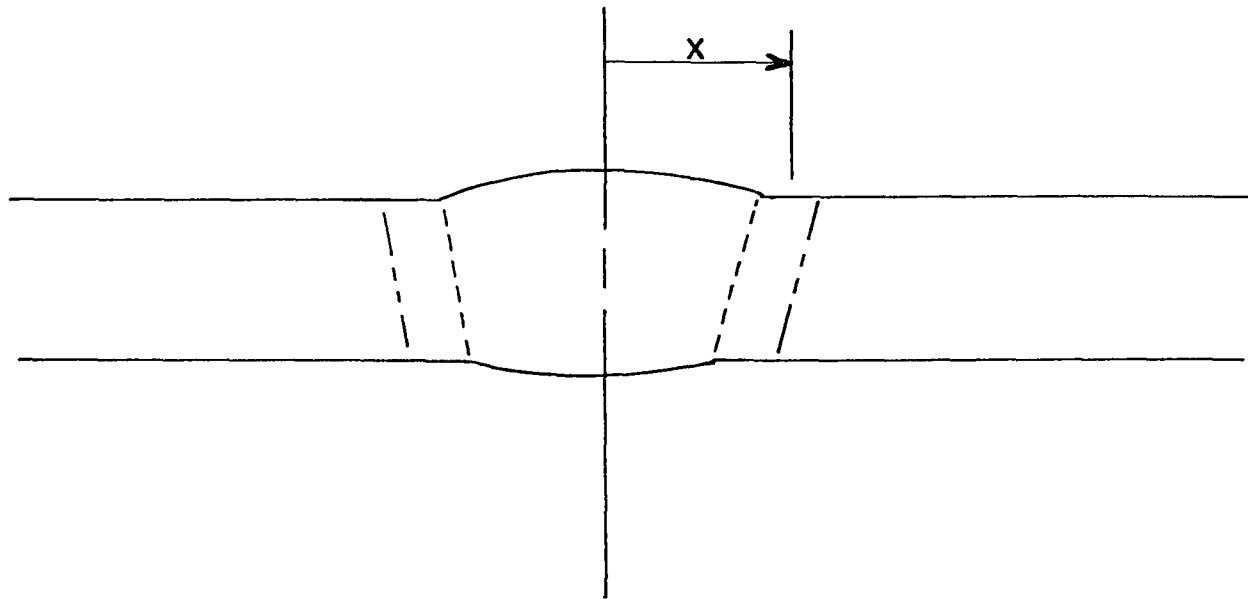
FLAW PLACEMENT DETAIL IN THE WELDED SPECIMENS
